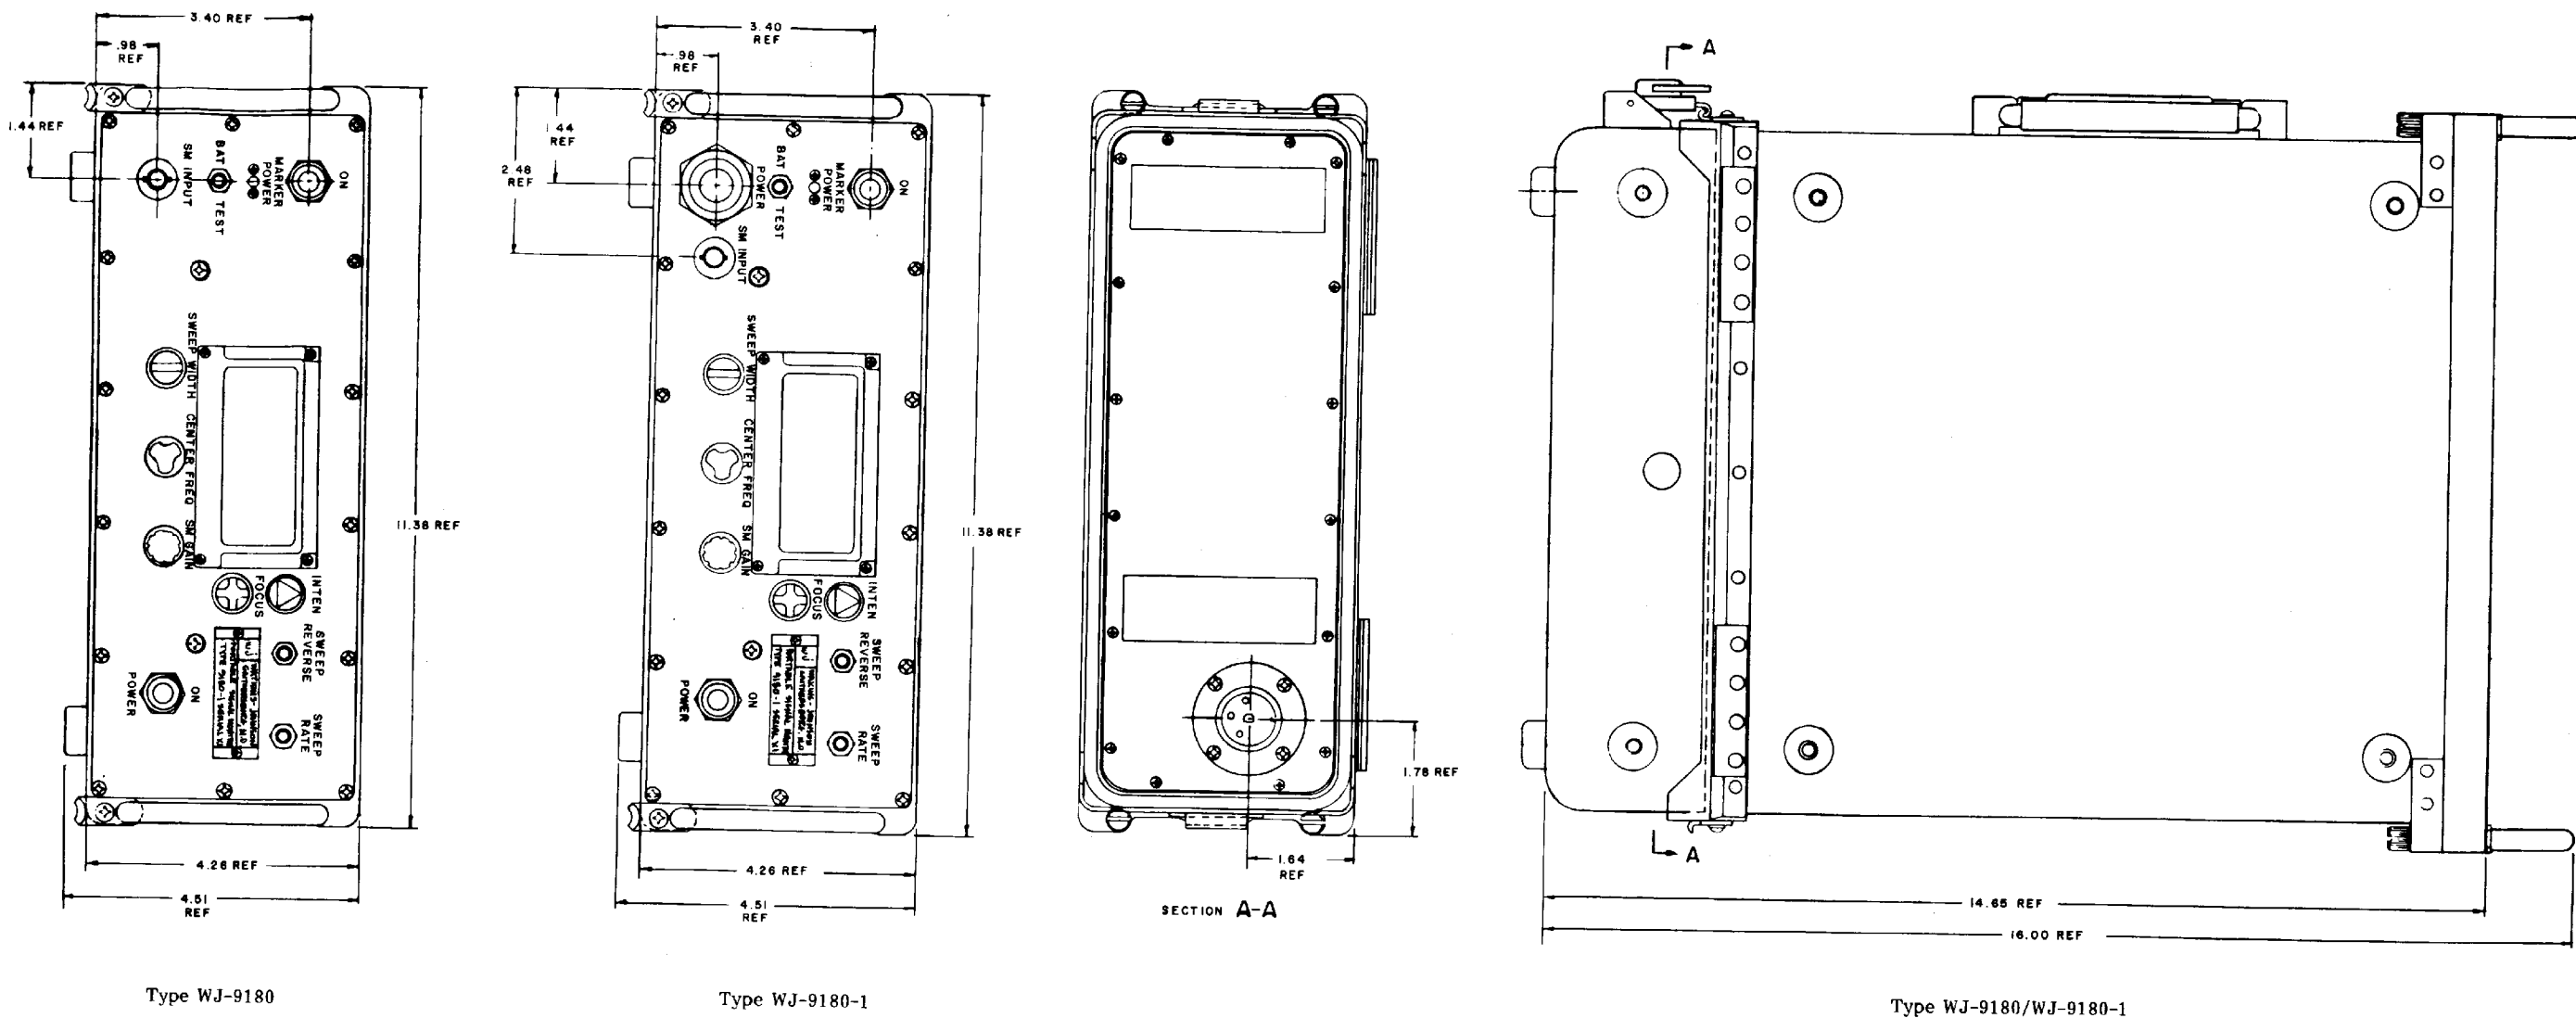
Type WJ-9180/9180-1 Critical Dimensions Drawing.
